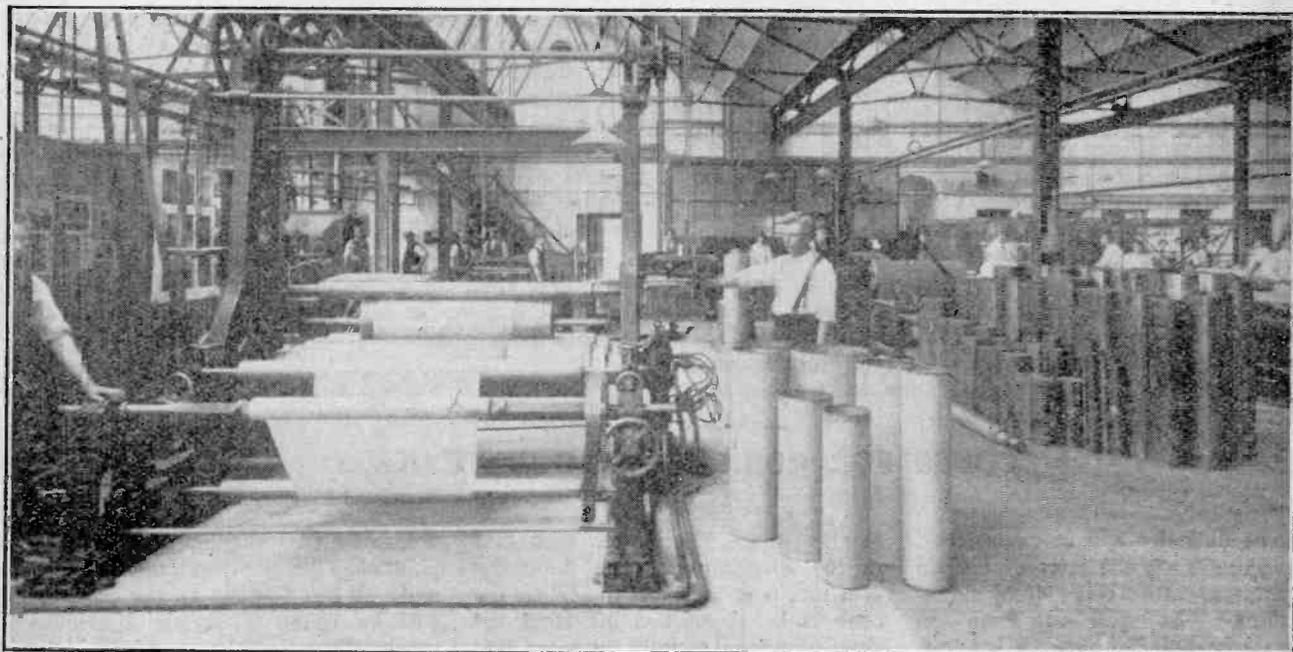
A tube-winding machine. The bakelised paper is slowly wound round mandrels against which electrically-heated rollers apply a heavy pressure.
